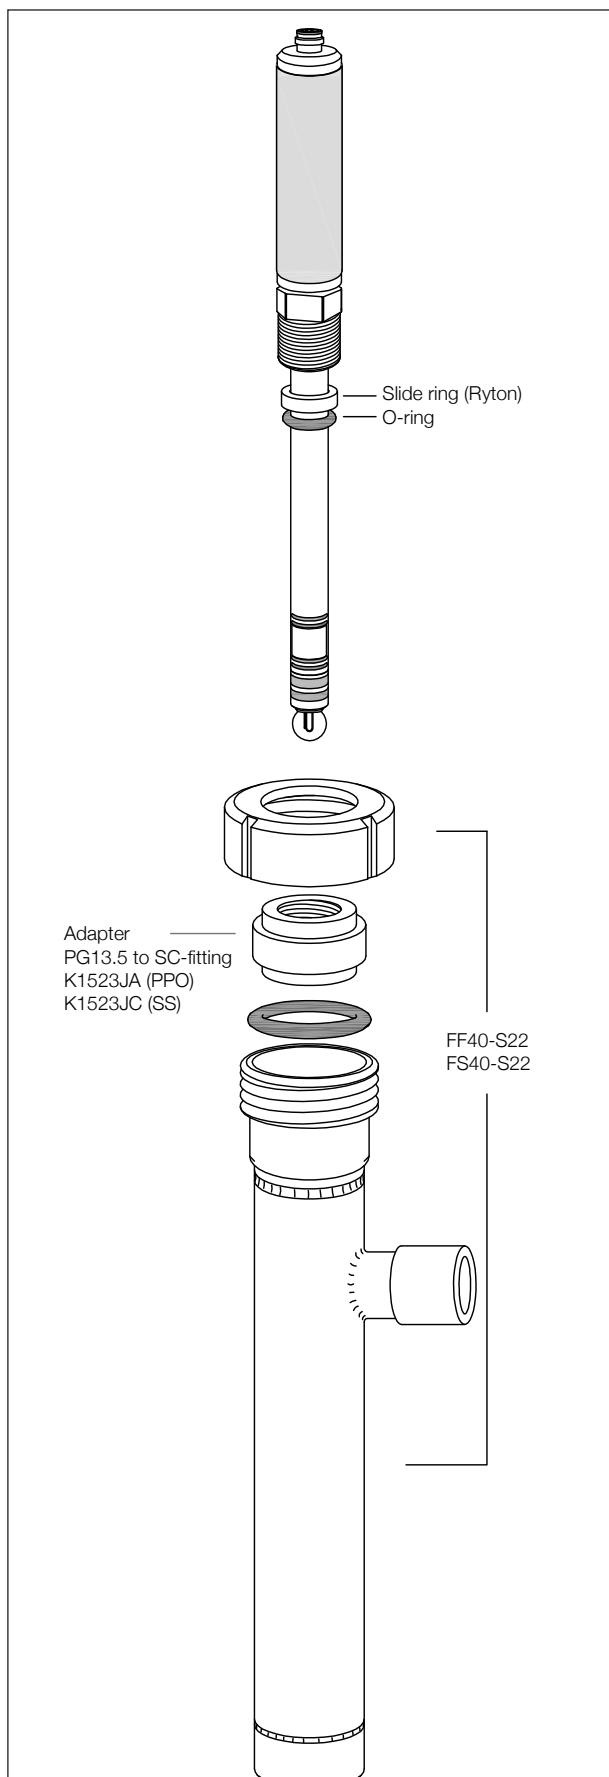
Mounting of sensor in metal FF40 fitting, using adapter K1523JA / K1523JC
